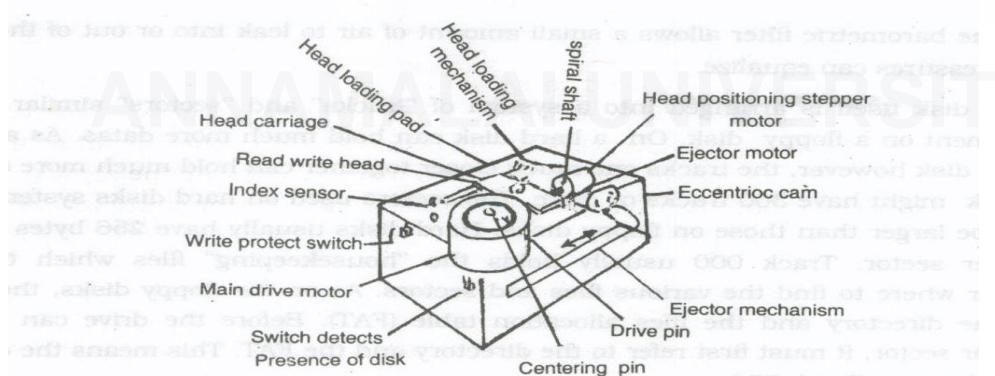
Illustration of 3.5 inch disk drive mechanism
